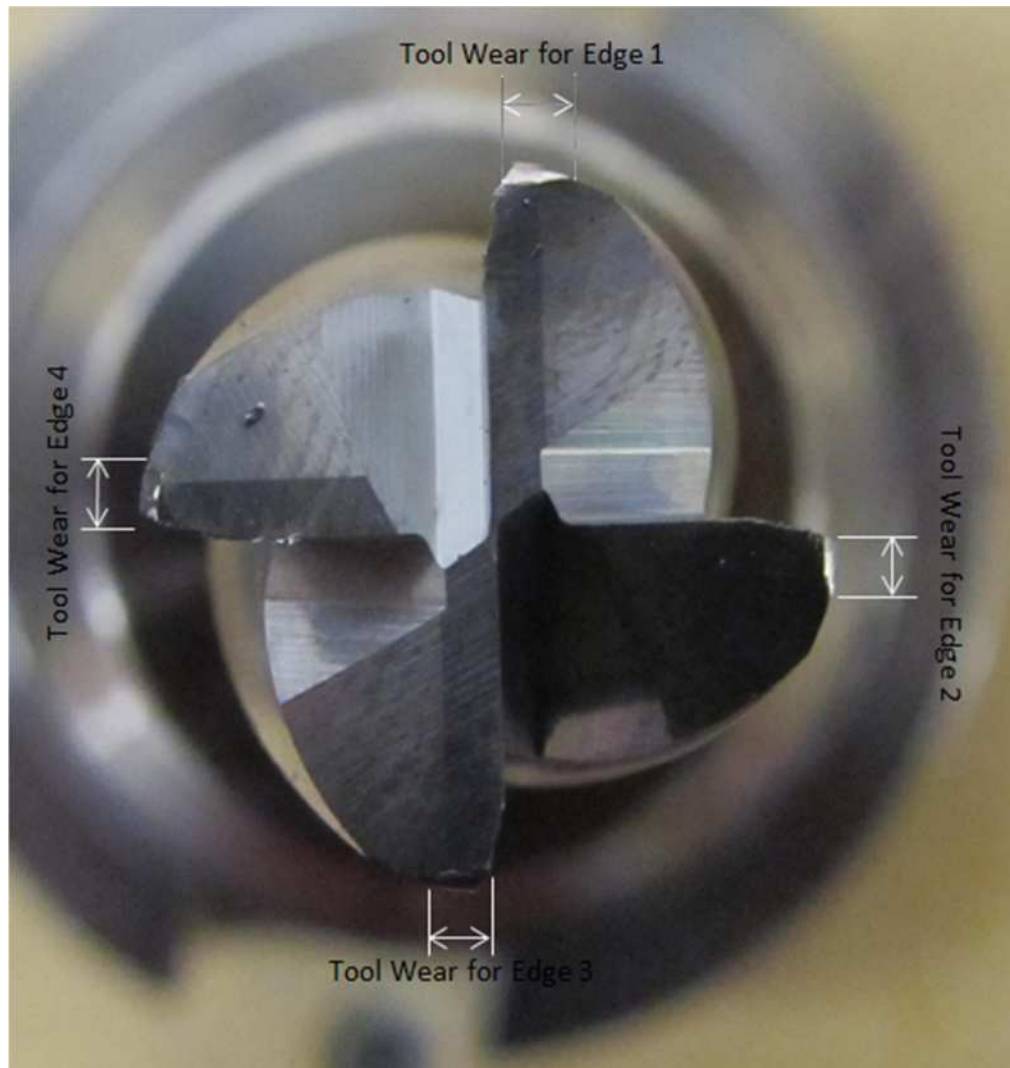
Tool Wear for 0.5 Inch End Mill
